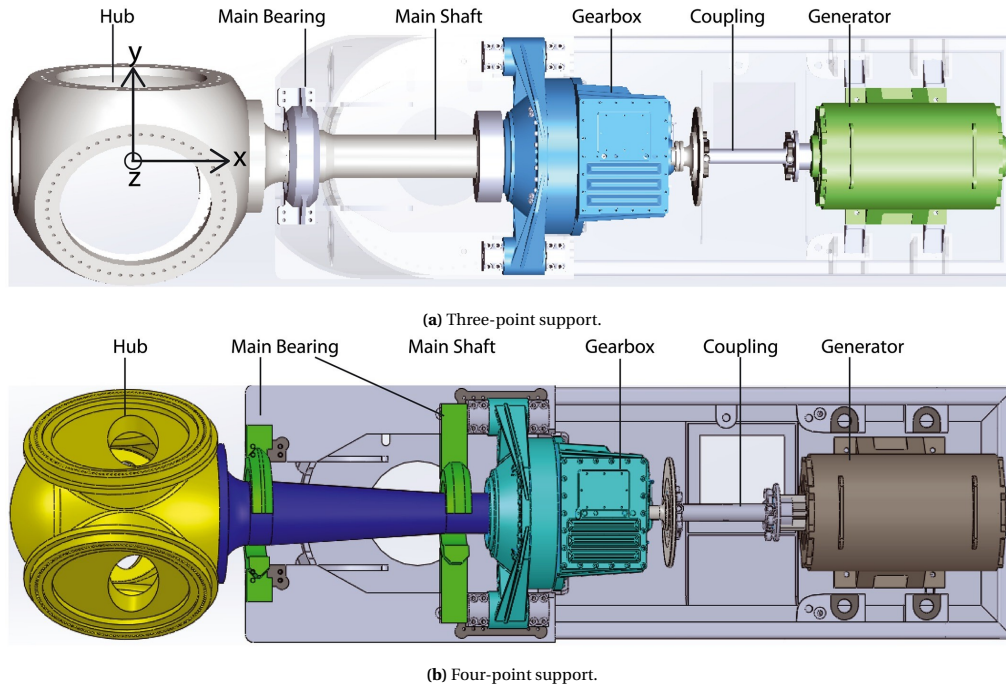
The two most common suspension types for wind turbine drivetrains with gearbox [14].
